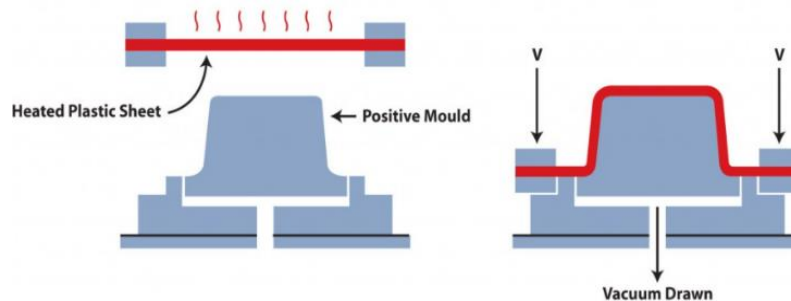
Thermoforming (Euro Extrusions Ltd, 2016).
